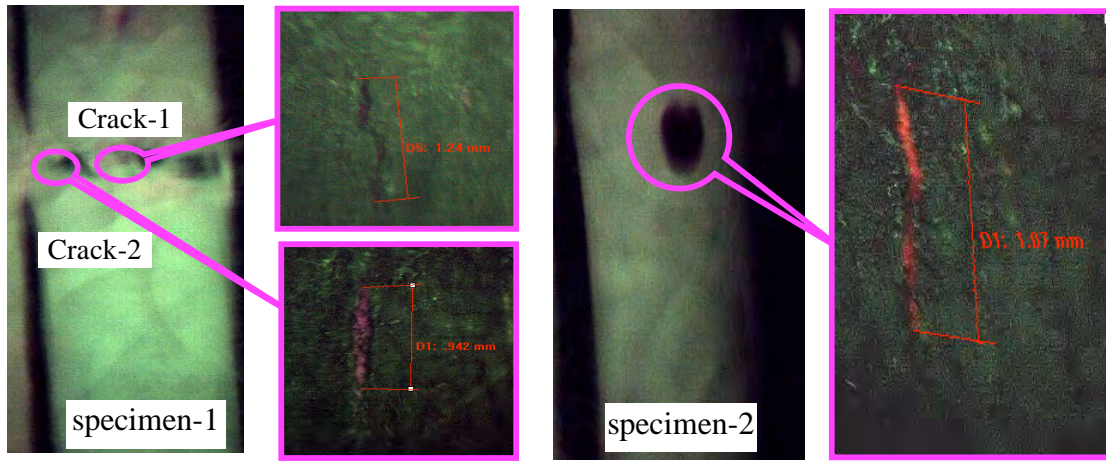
Longitudinal cracks seen in the fuel pins at the welding zone
